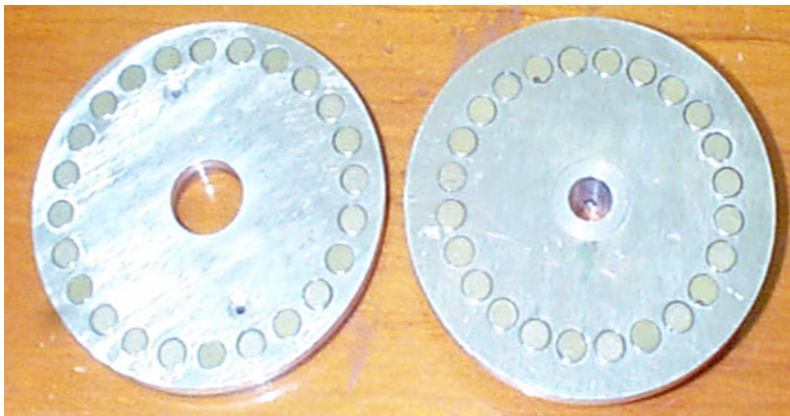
Fabricated magnetic bearing with 24 magnets each in stator and rotor
